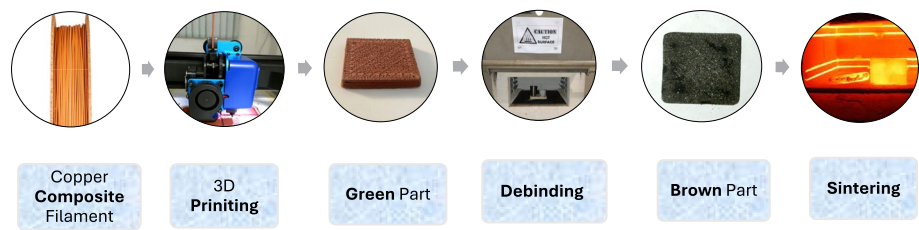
Illustrates the process flow of Metal Extrusion 3D printing
